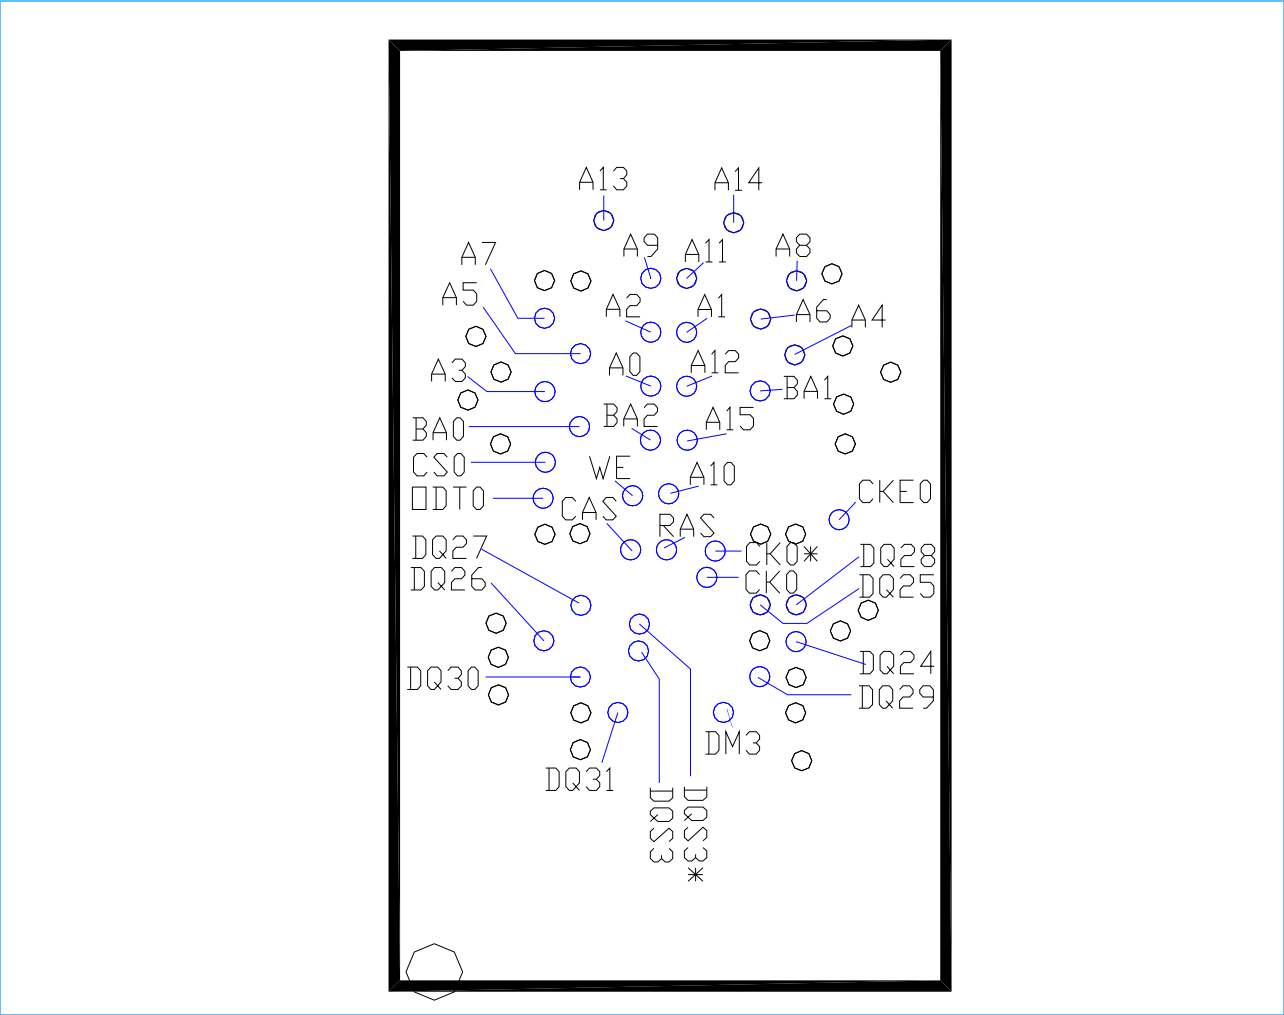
Test Point Identification (Raw Card Version A): Bottom View
